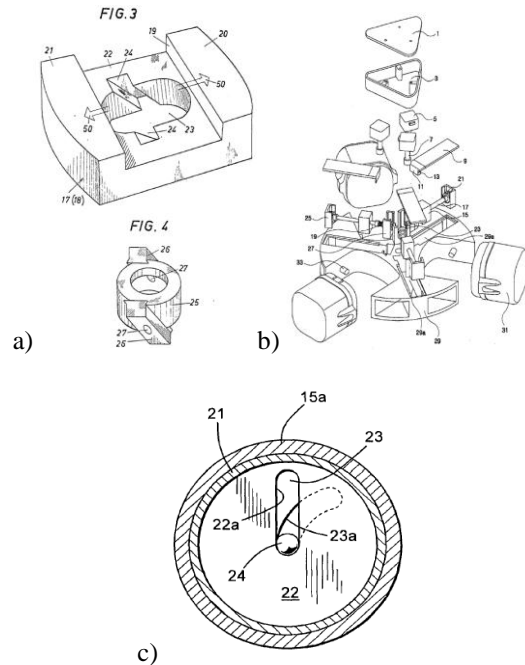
a) rings with guides [23]; b) screw and nut method [24]; c) guiding groove [25]
